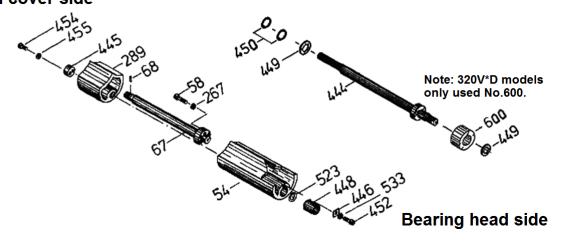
Variable Vi Auxiliary Slide Valve, Unloader Slide Valve and Vi Adjusting Rod
